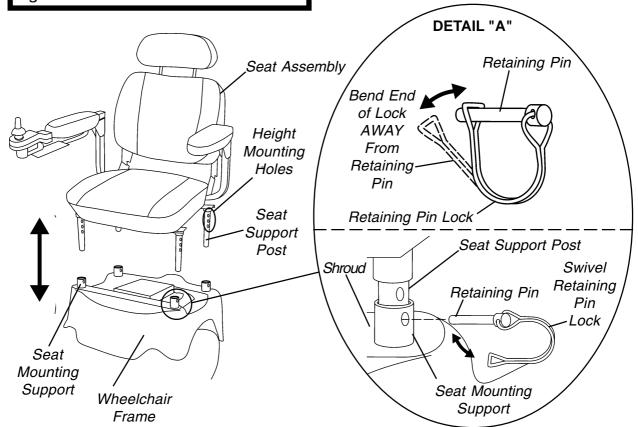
REMOVING/INSTALLING THE SEAT ASSEMBLY - SEAT ASSEMBLIES WITHOUT SEAT SUPPORT COLLARS
